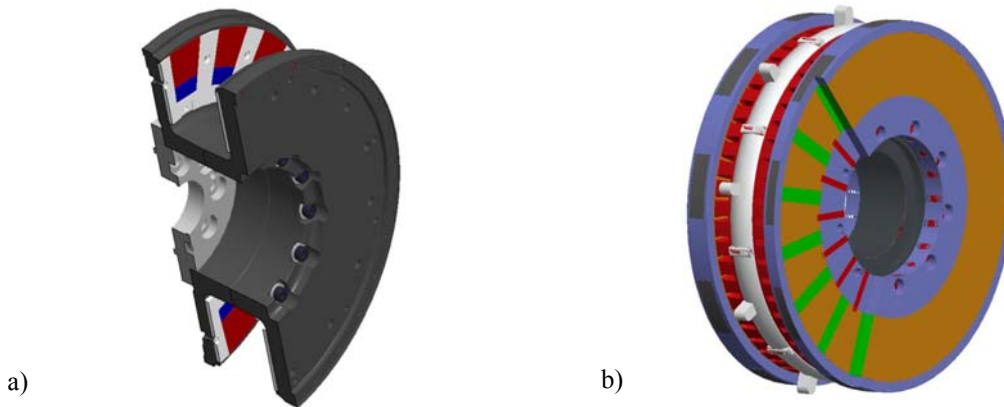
Cross-sectional views of axial flux permanent magnet machines: a) with Iron Poles, and b) PMs embedded in spoke arrangement
